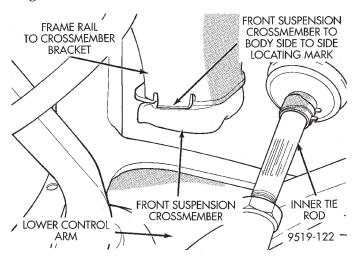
Front Suspension Crossmember Side To Side Locating Mark
